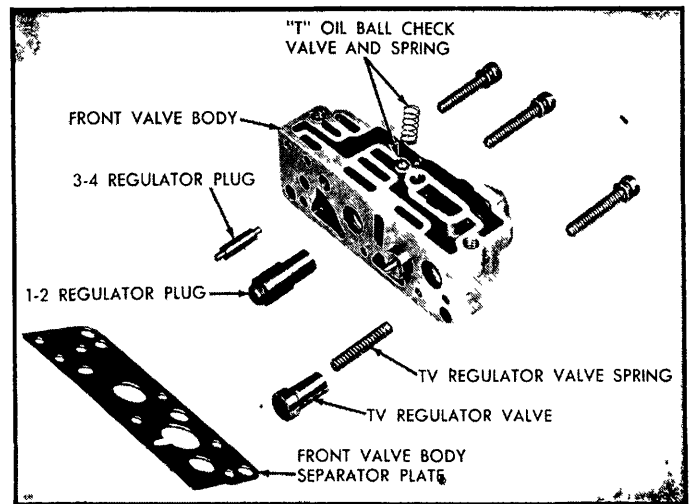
Layout of regulator plugs, TV regulator valve and spring. 1952
